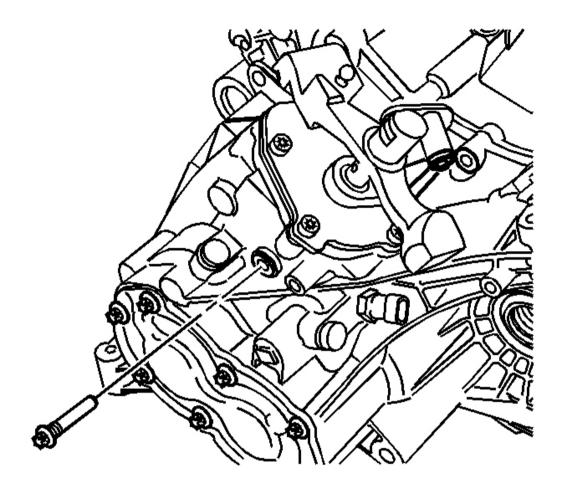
Shifter Guide Bolt Courtesy of GENERAL MOTORS CORP.
